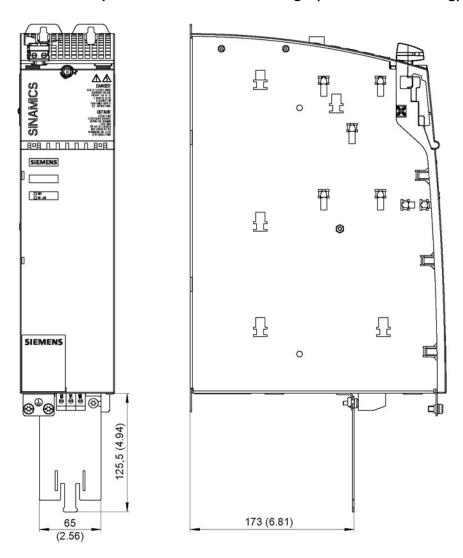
Dimension drawing of shield connecting plate on a 100 mm component with internal air cooling, all dimensions in mm and (inches)
